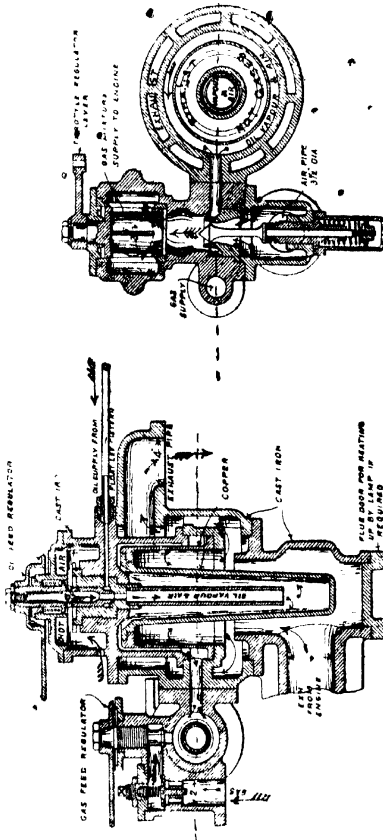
Butler exhaust-heated vapouriser, inspirator, and governor valve for a titrating 13.1-m diam  $\times$  22-in combined oil and gas engine, interchangeable while running.
